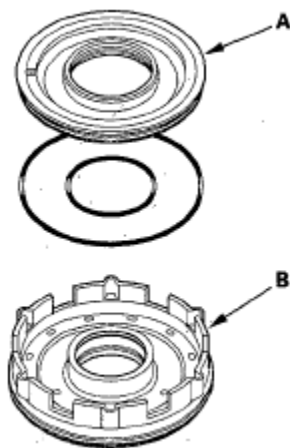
Identifying 1st-Hold Clutch Piston And 1st Clutch Piston
